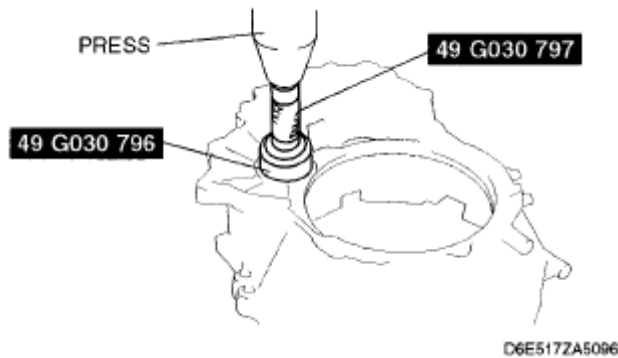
Installing Selected Adjustment Shim To Converter Housing
